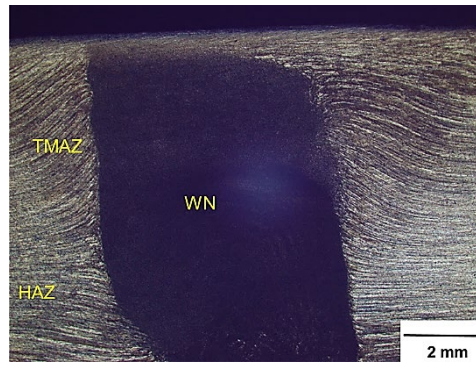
Cross section of the weld showing various weld zones of double-side friction stir welded AA 7075.
